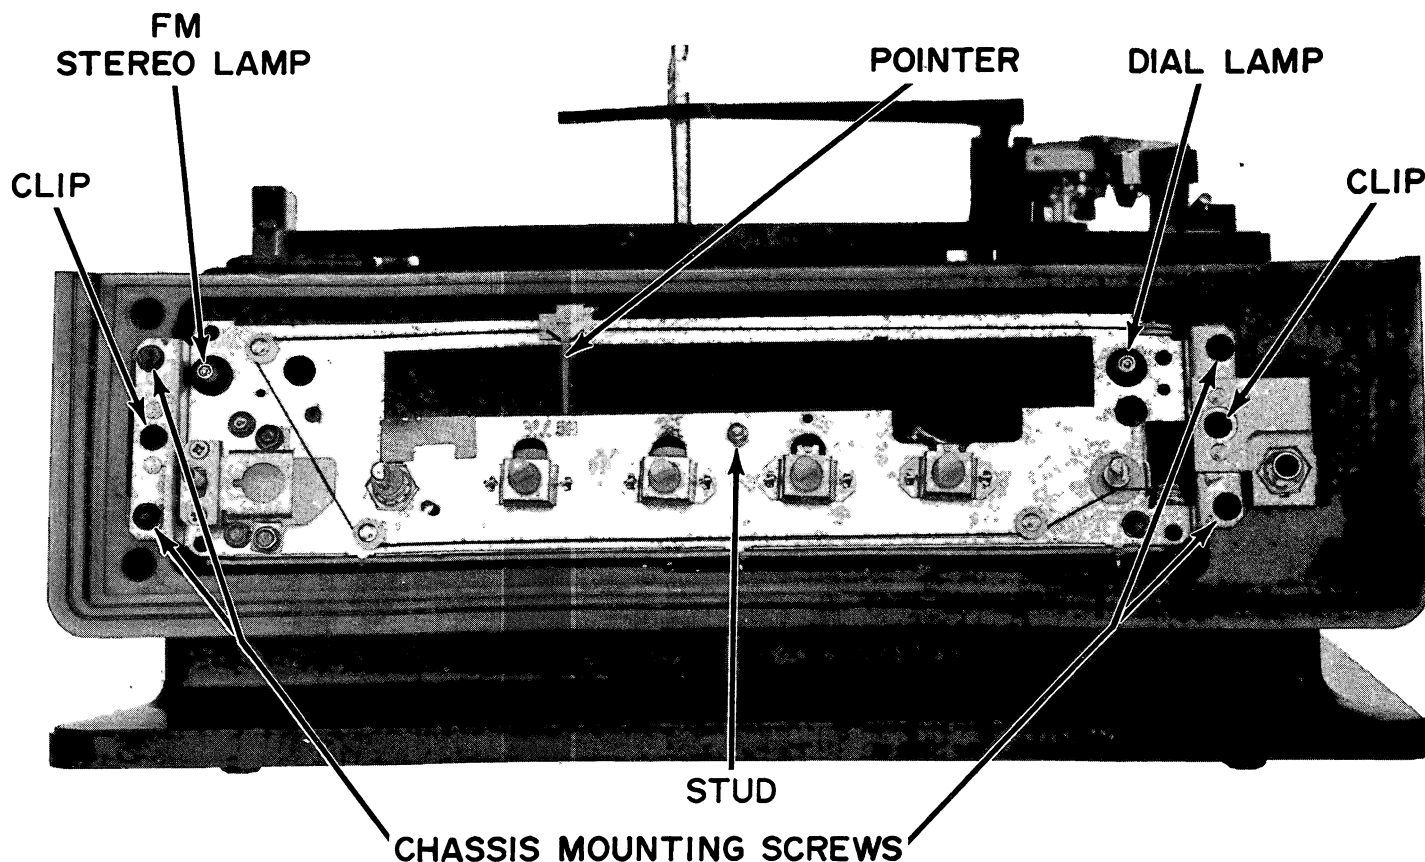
OUT FRONT CHASSIS REMOVAL – GROUP “B”
